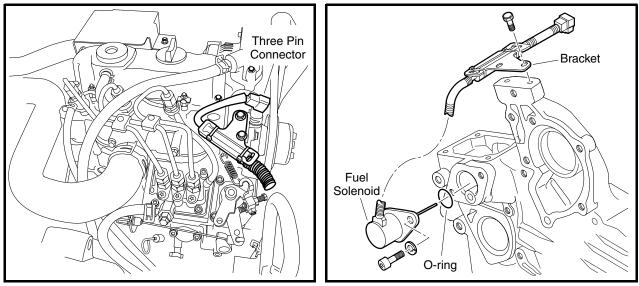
3 Fuel Solenoid Three-Pin Connector
